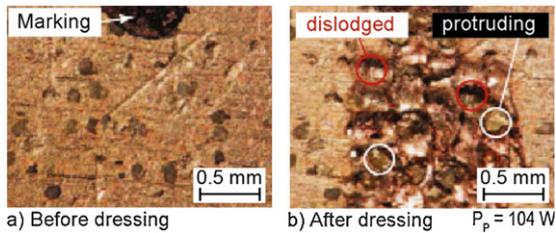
Wheel topography before and after laser sharpening [60].
